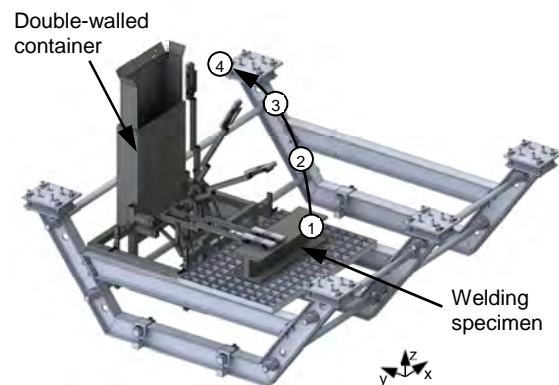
Device for welding standard hydrogen samples under water
